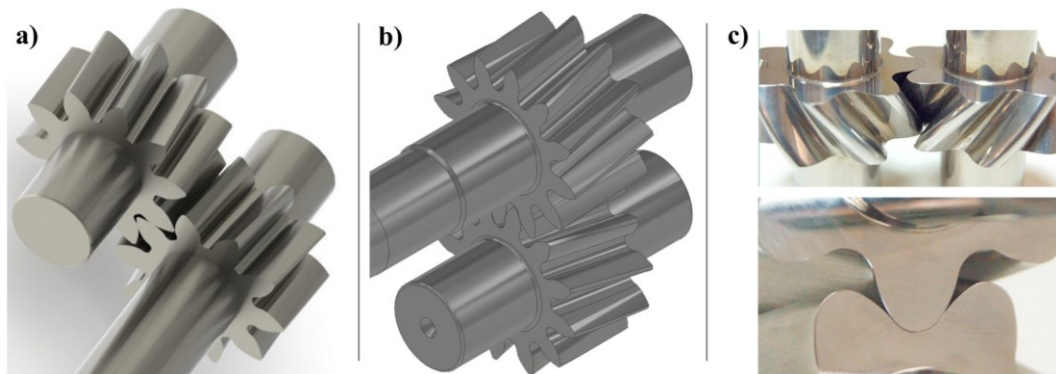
Type of teeth profiles: a) spur gears; b) helical Gear; c) continuous-contact circular helical gear.
